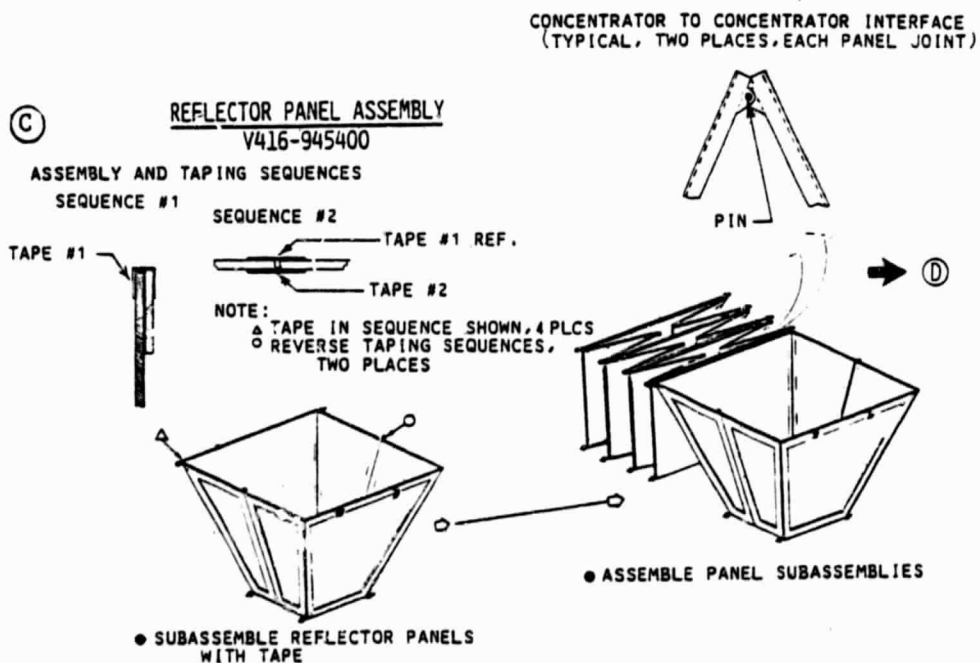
Concentrator Element Subassembly and Stack Assembly
